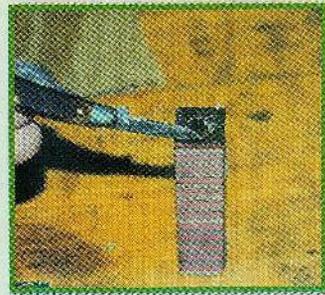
Usually a little of the glue will creep into the inside of the tubes, making final assembly impossible. Use a sharp pen knife to remove the glue.
